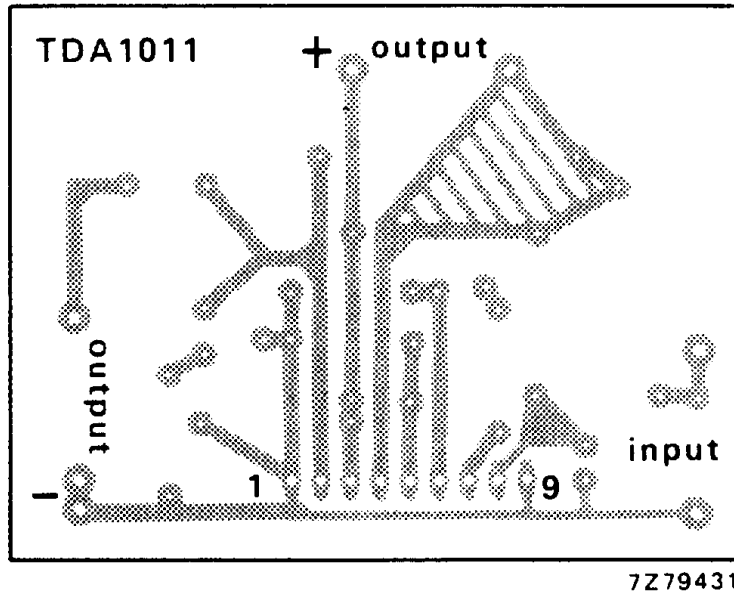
Track side of printed-circuit board used for the circuit of Fig.4; p.c. board dimensions 62 mm × 48 mm.
